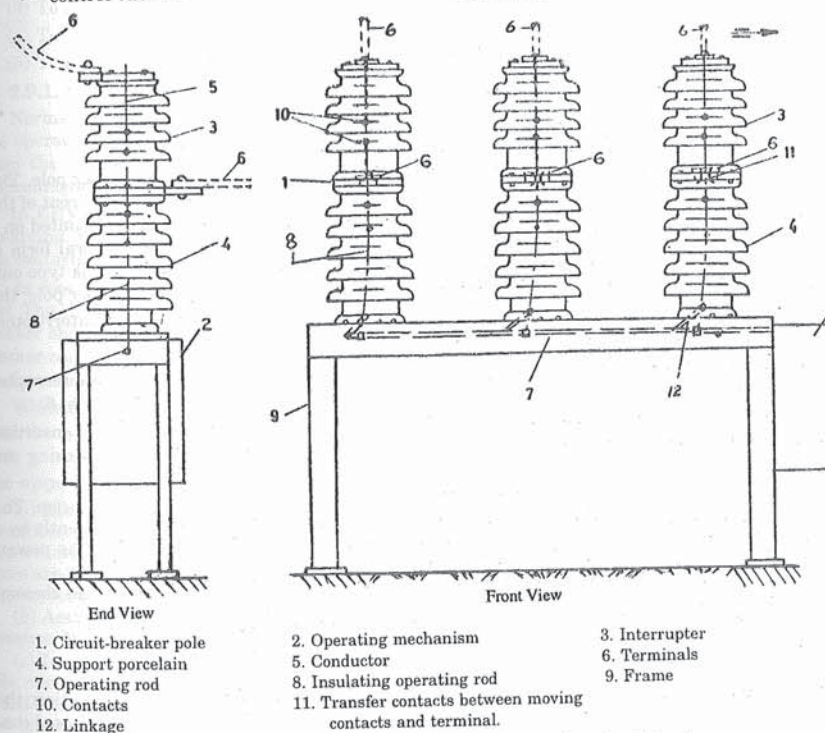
Diagram illustrating the assembly of an outdoor circuit-breaker.
